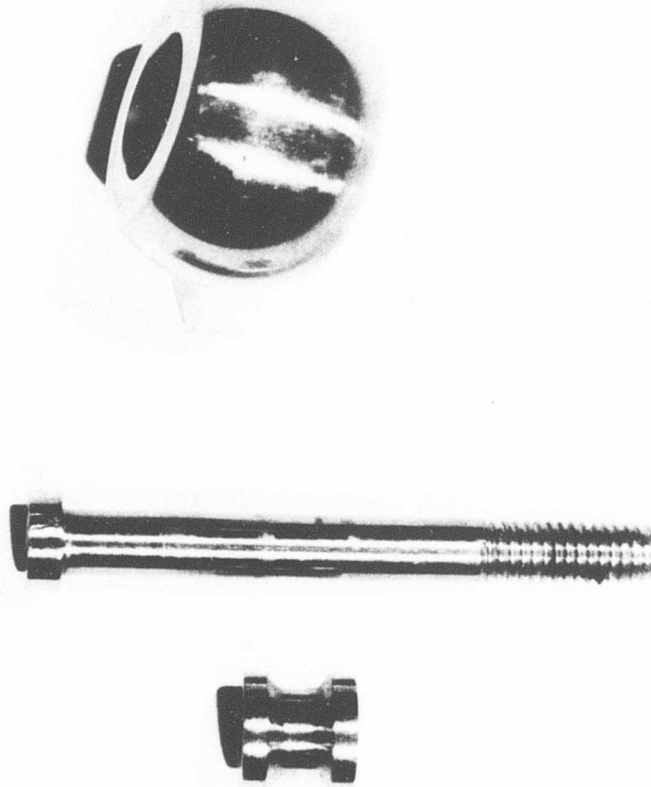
Modified Roller Spacer With Roller Shaft and Bearing Showing Lack of Damage After Test.
